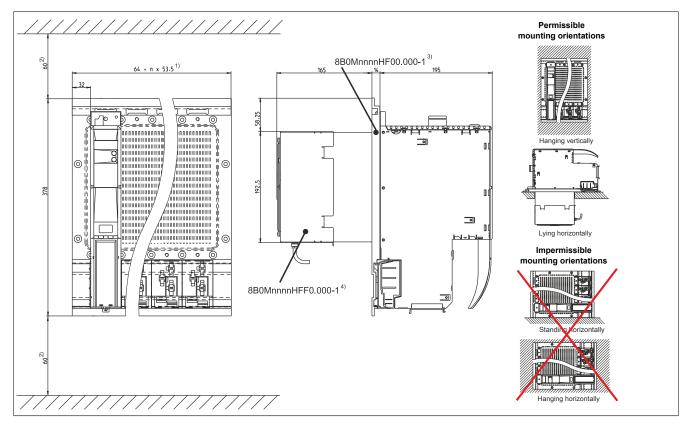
Feed-through mounting - Dimension diagram and installation dimensions
